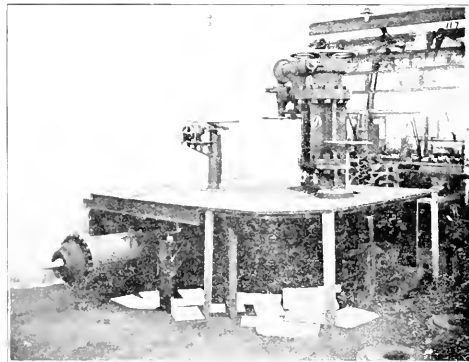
Arrangement of Nozzle, Gate and Floor Plate for Stanislaus Power Company.
